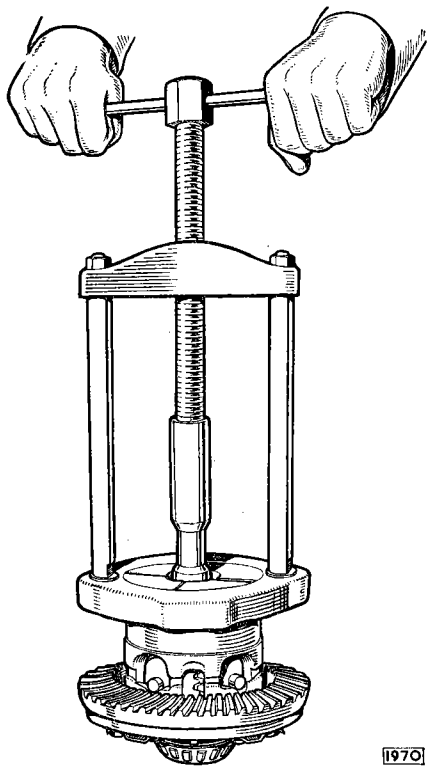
Withdrawing a differential bearing using Churchill Tool No. SL.14 with adaptor SL.14-3
